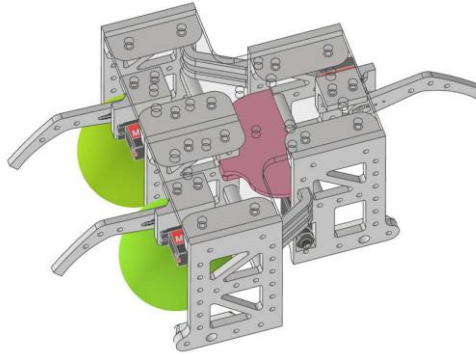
CAD diagram of the internal circuit of the three-ball machine
